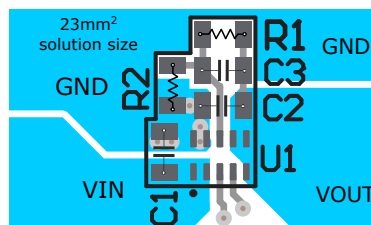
TPSM82A823x PCB Layout for the Adjustable Devices (BOM as per List of Components With 2 × 22μF for C2)
